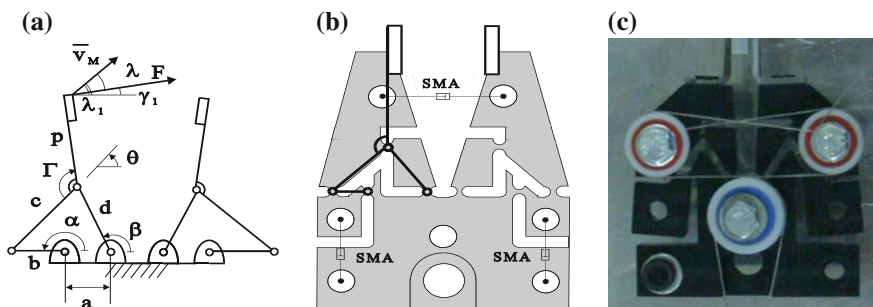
A milli-gripper design: a Kinematic chain with design parameters; b A design scheme considering shape memory alloy (SMA) actuators; c A built prototype at LARM
